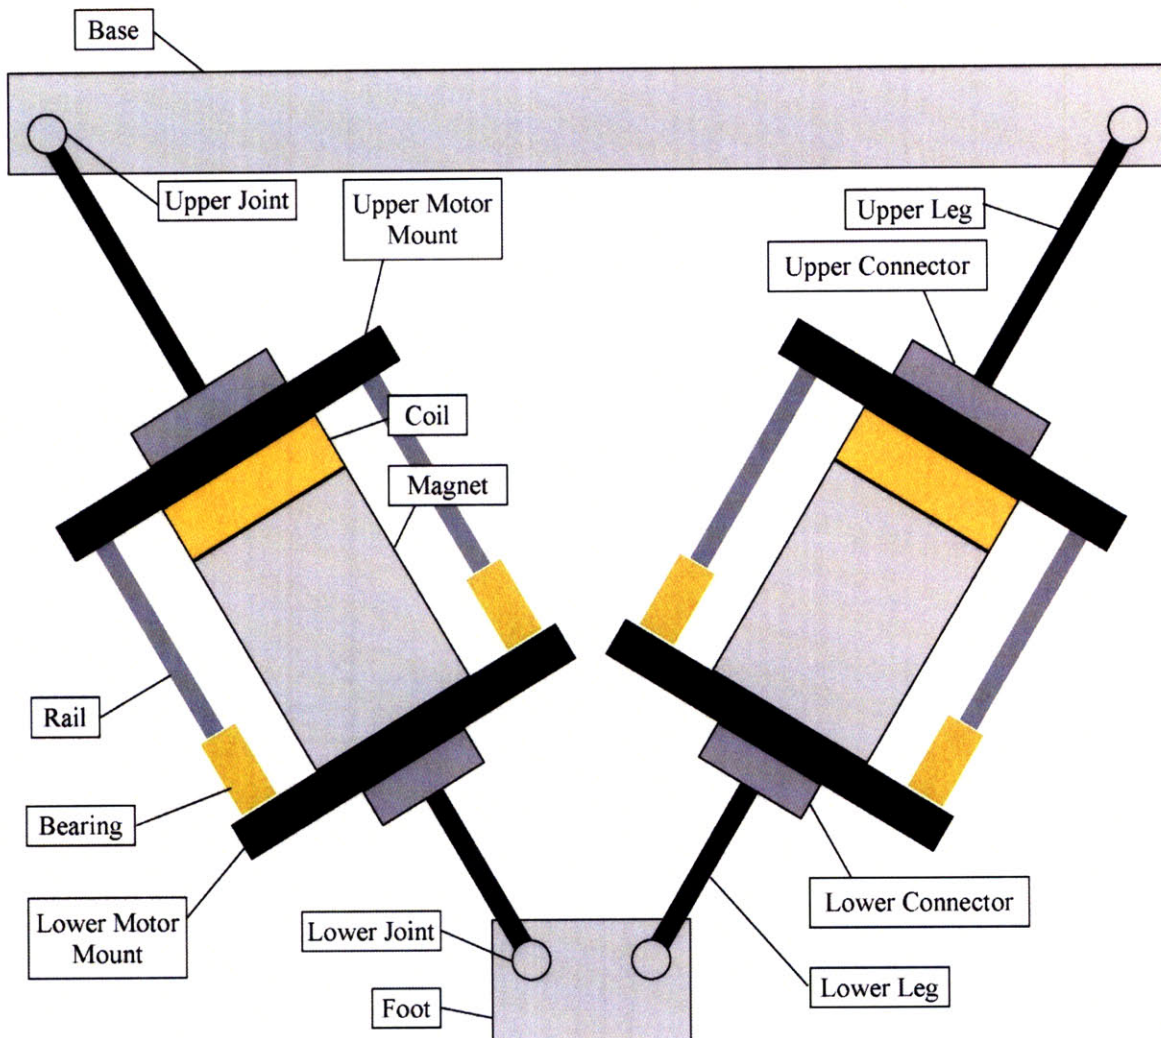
shows the parts that will make up the robot. The coil is attached to the upper motor mount, which attaches to the upper leg with the upper connector. The upper leg attaches to the base through a pin joint. The magnet attaches to the lower motor mount, which attaches to the lower leg with the lower connector. The lower leg attaches to the foot with a pin joint.
